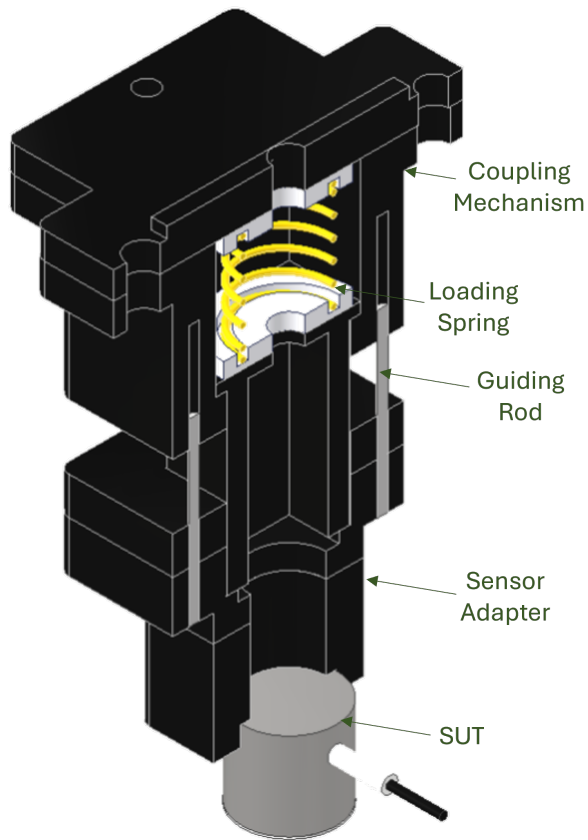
Illustration of the 3D-printed SUT coupling mechanism. Adapted from [23].
